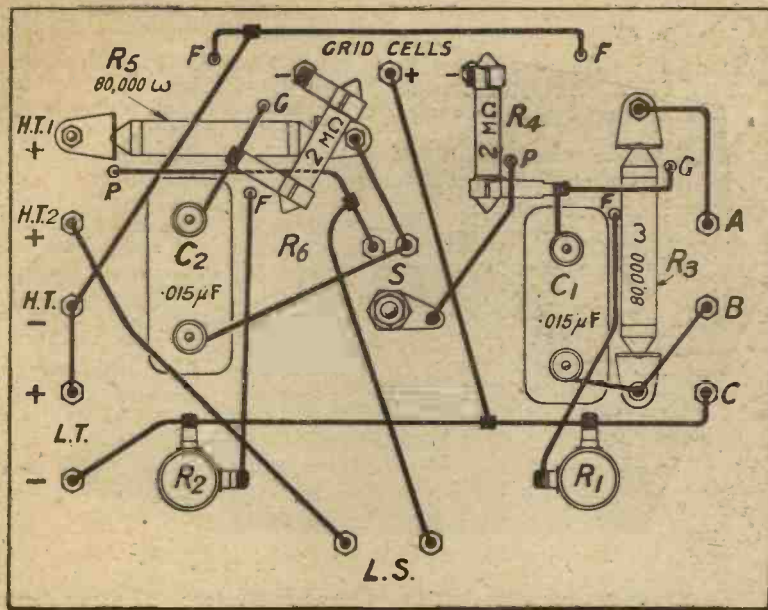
Showing the internal wiring of the magnifying unit. Blueprint No. C 1010B (full size).
